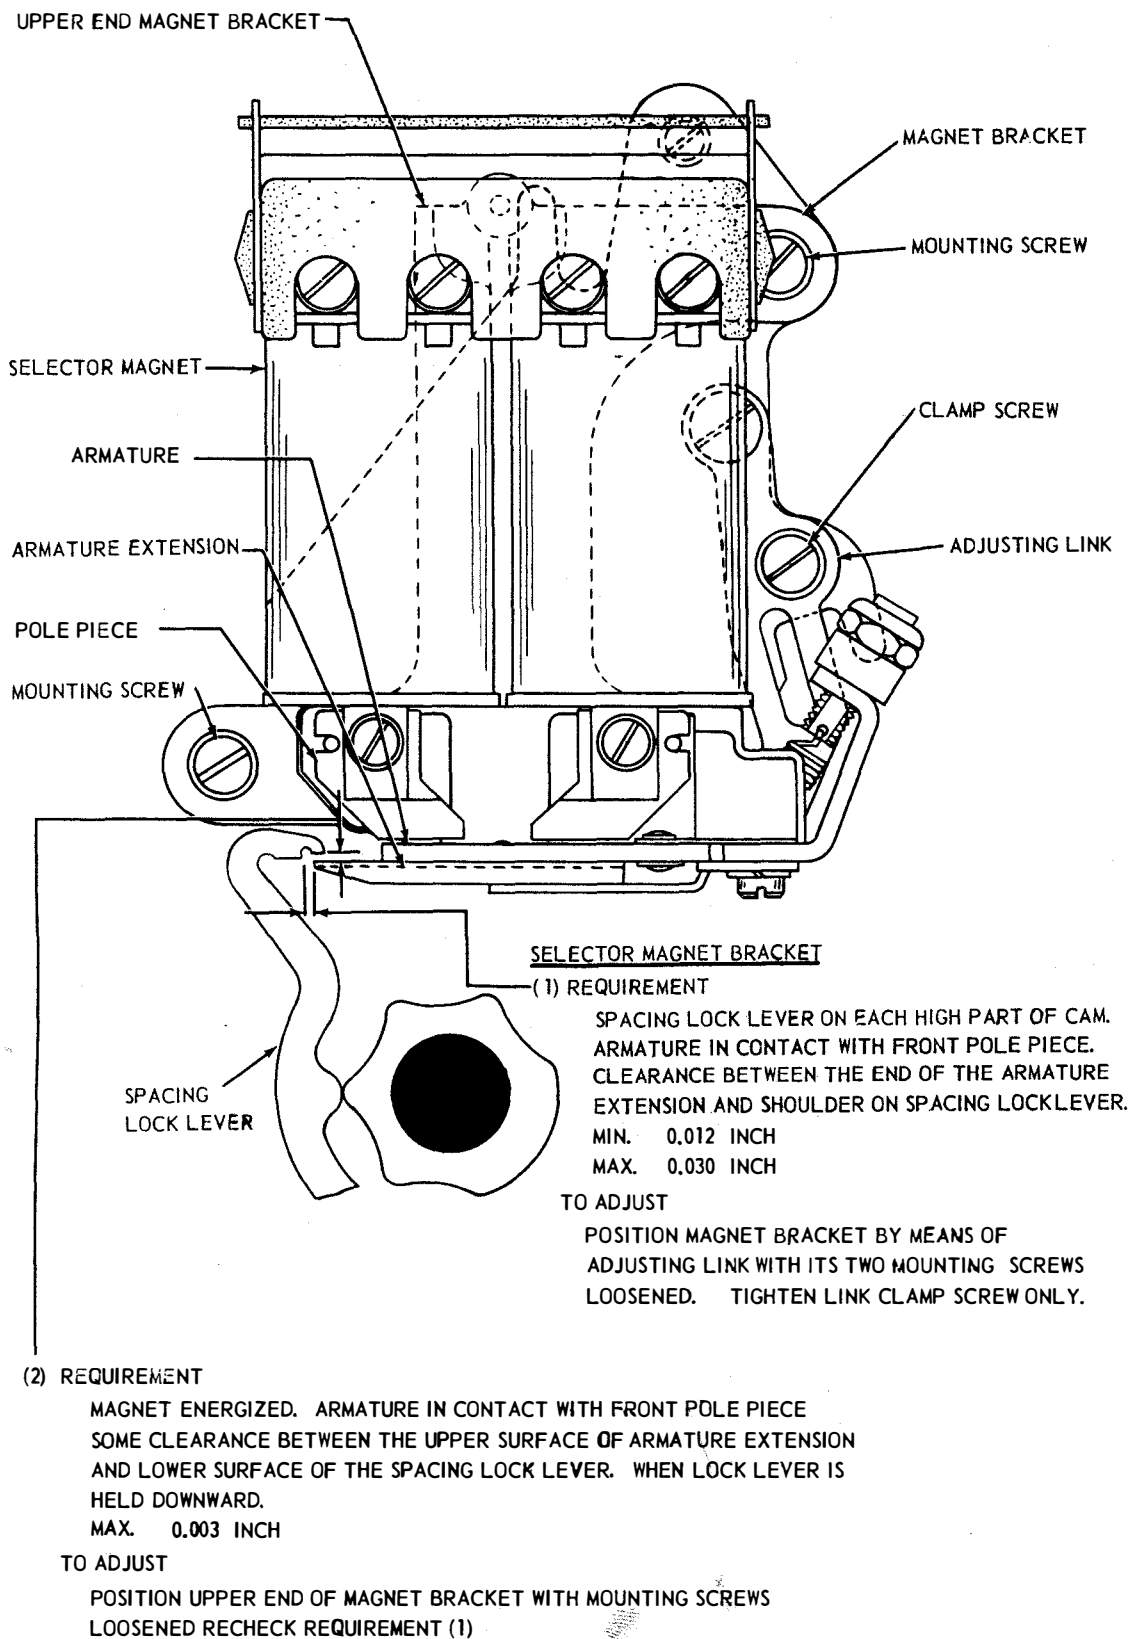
Automatic Typewriter, Selector Magnet, Right Side View
